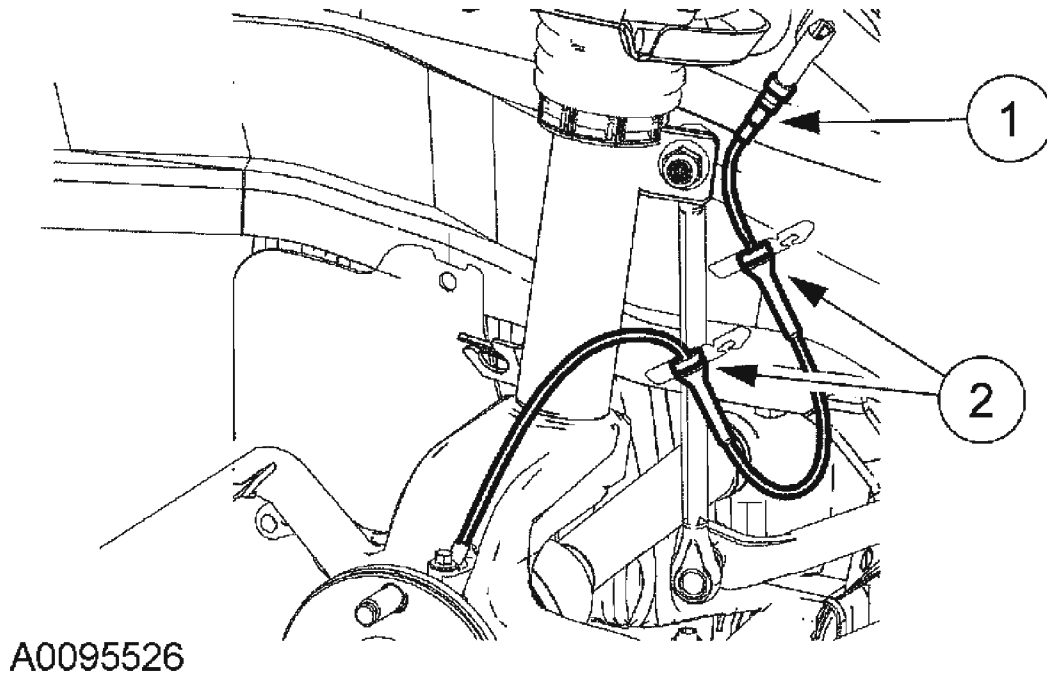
Disconnecting Wheel Speed Sensor Wiring Harness
